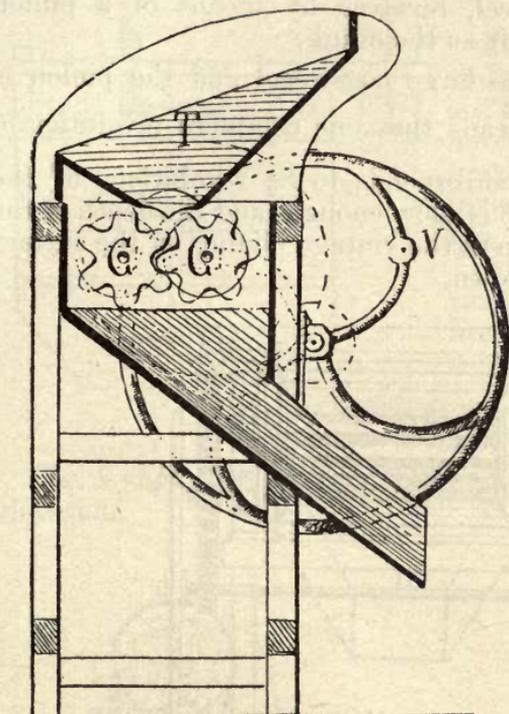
Blaquière's Crusher (side elevation).—G G, crushing cylinders; T, hopper; V, crank wheel.
